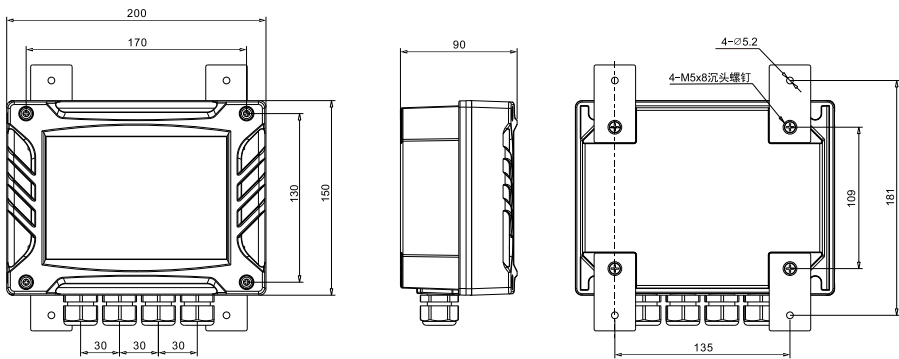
Remote Converter Outline Dimensions (Unit: mm)
